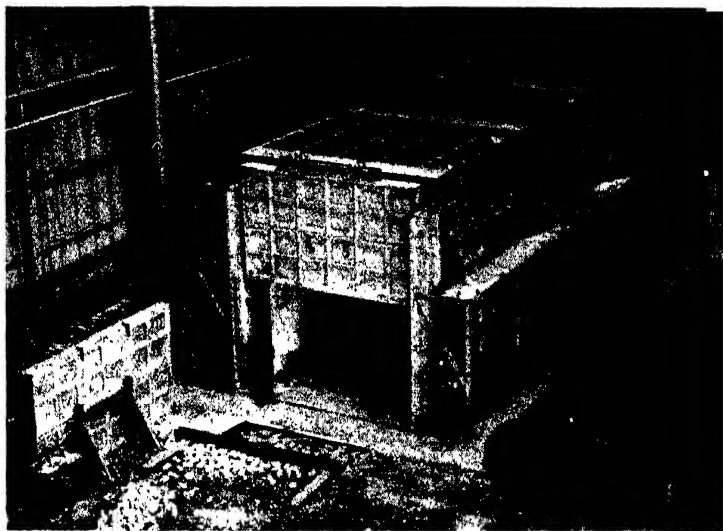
GAS-FIRED PORTABLE COVER-TYPE STRESS-RELIEVING FURNACE AT THE WORKS OF G. A. HARVEY & CO. (LONDON), LTD. (*Courtesy "Welding"*)
